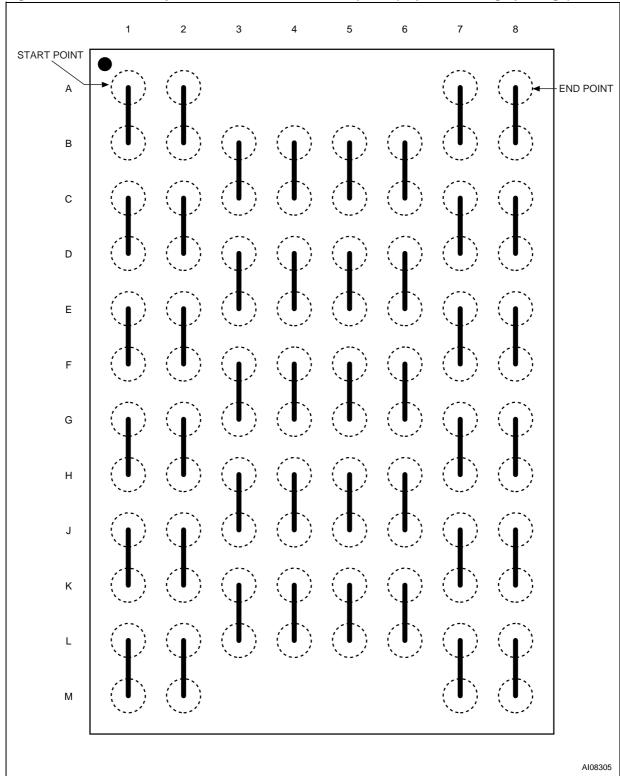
TFBGA88 Daisy Chain - PCB Connection Proposal (Top view through package)
